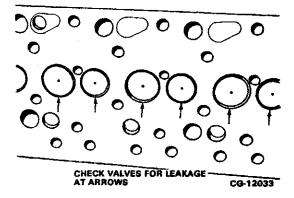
Inspect Valves for Leakage PRESSURE CHECK CYLINDER HEAD
